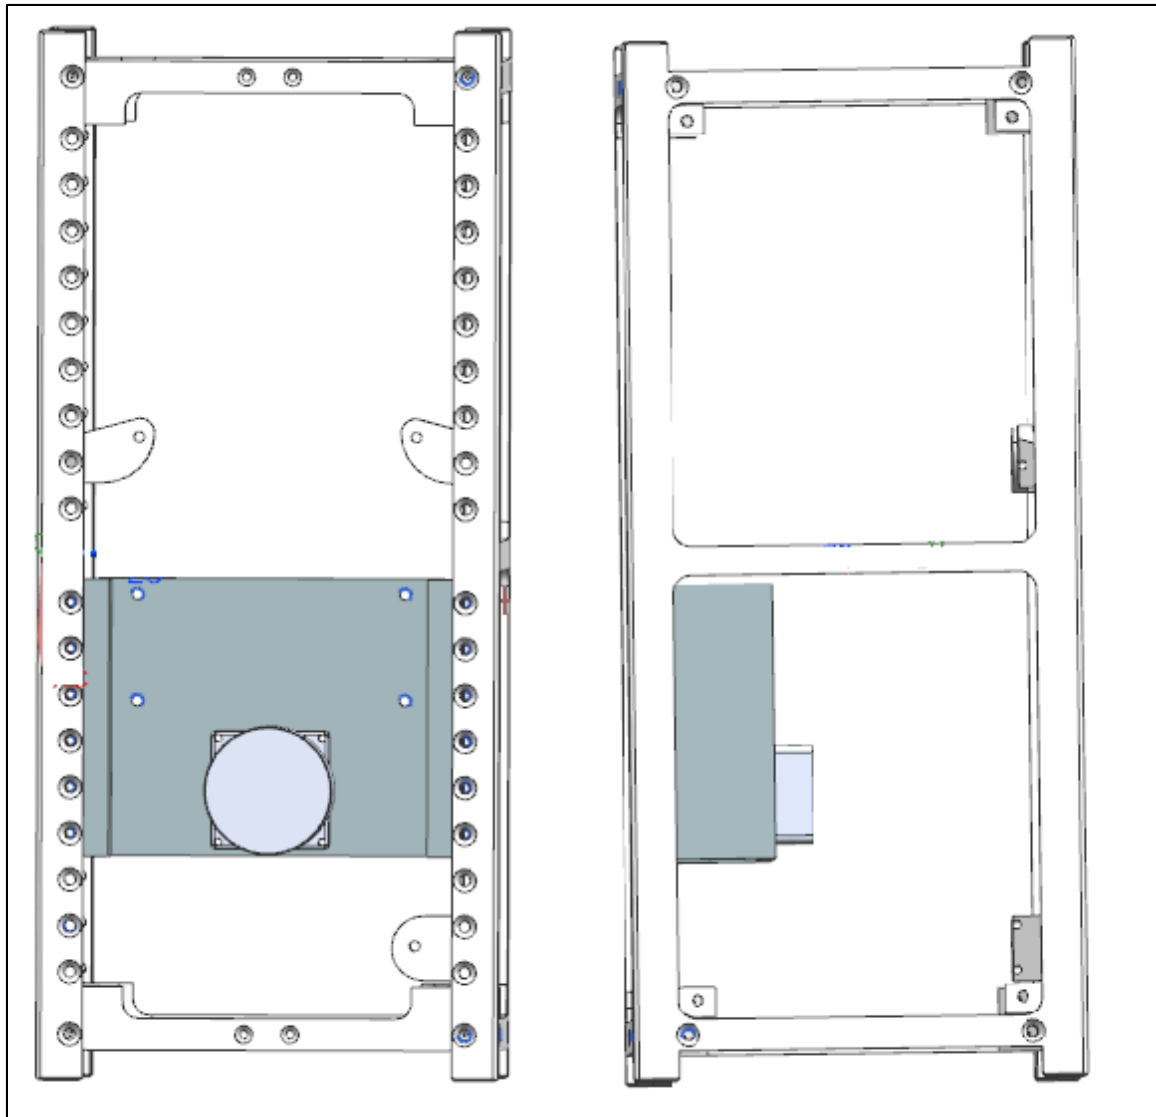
Front and Side View of CAD Model Mounting TIC EDU onto a 2U CubeSat HAB Frame
